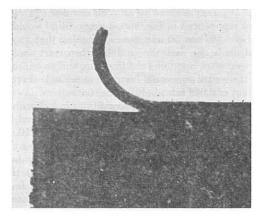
Chip Formed by Manual Pressure of Workpiece Against Vibrating Cutting Tool
